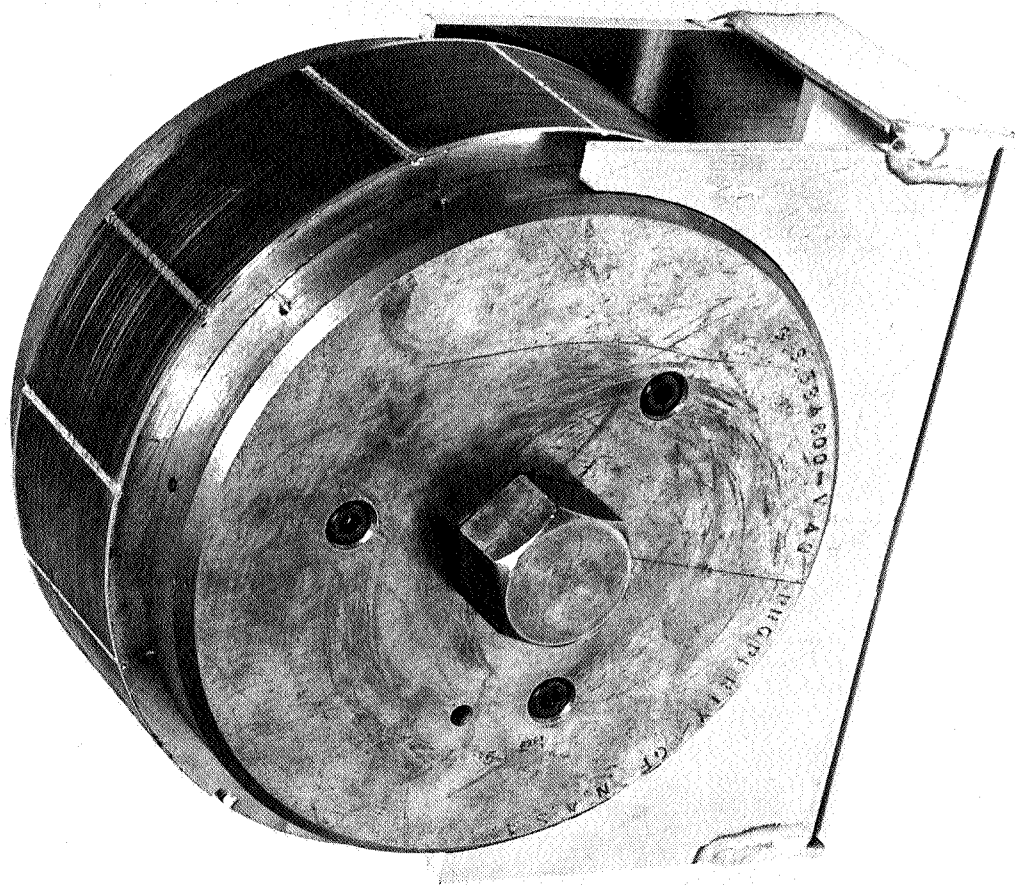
View of 1300° F Stator Stack Showing Electron Beam Welds
